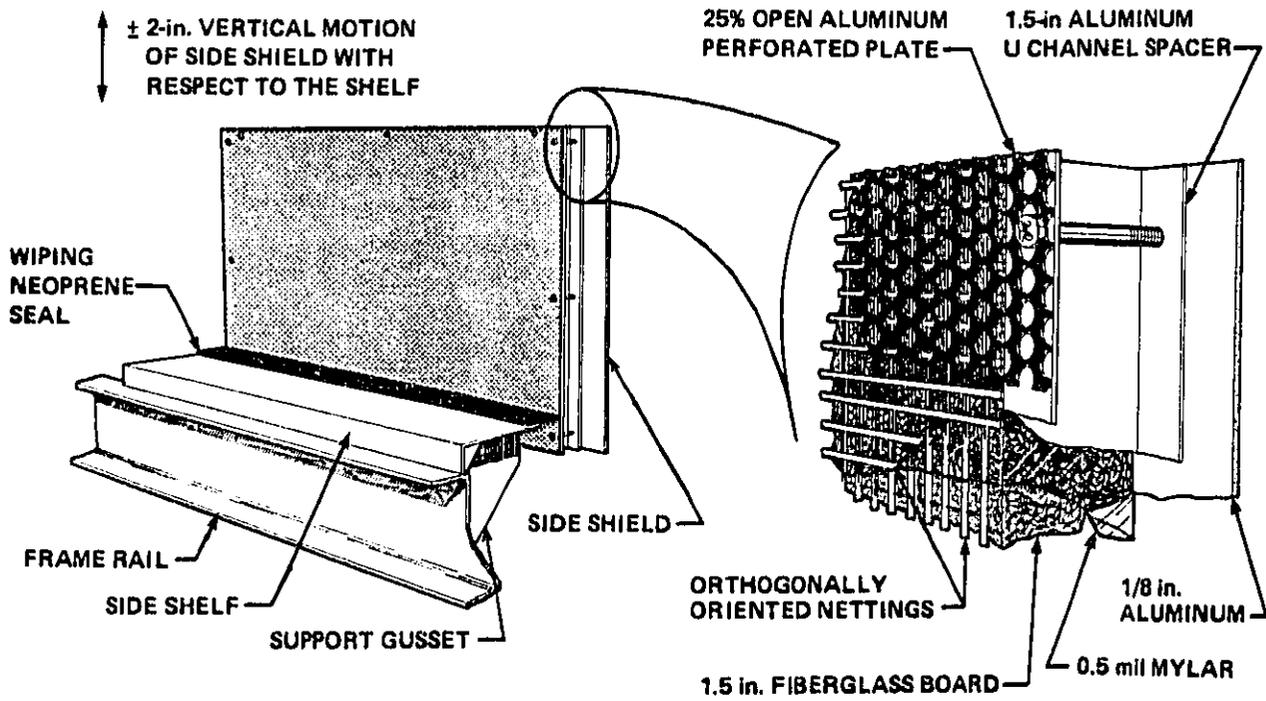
ILLUSTRATION OF SIDE SHELF ASSEMBLY AND DETAILS OF CONSTRUCTION OF SOUND ABSORPTIVE MATERIAL.
